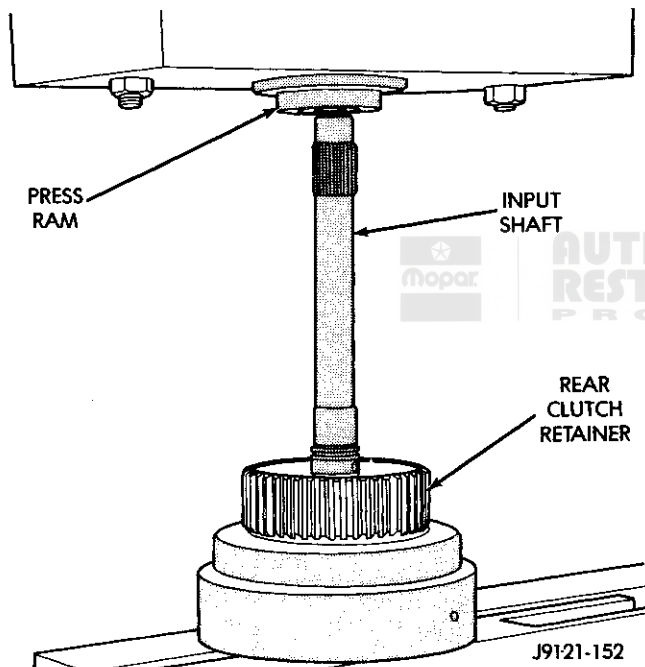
Pressing Input Shaft Into Rear Clutch Retainer
